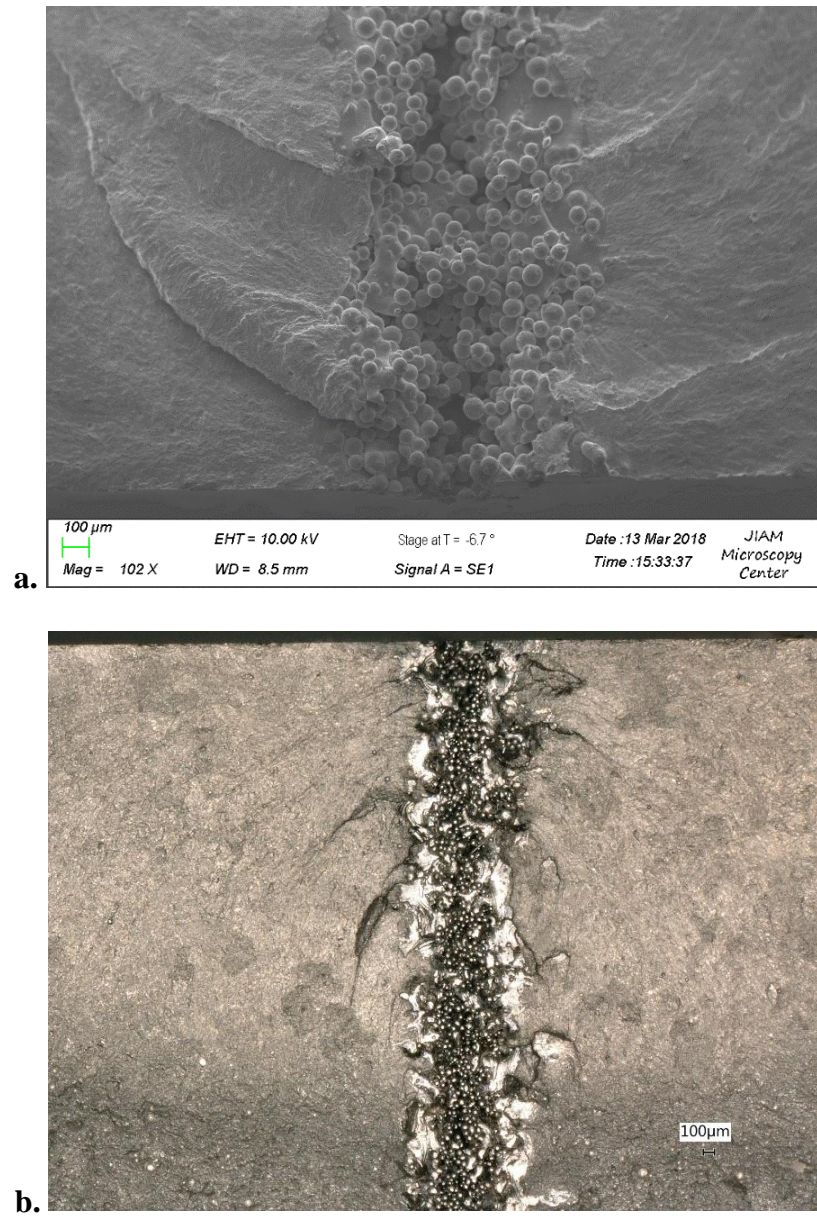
Fracture surface of a fatigued specimen with an as-fabricated hole highlighting the partially-sintered powder and rough surface throughout the bore of the hole.
